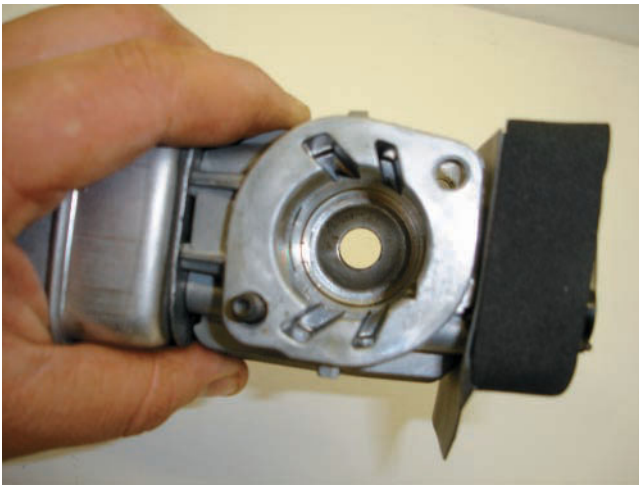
Check for small cracks or other damage in the combustion chamber.
